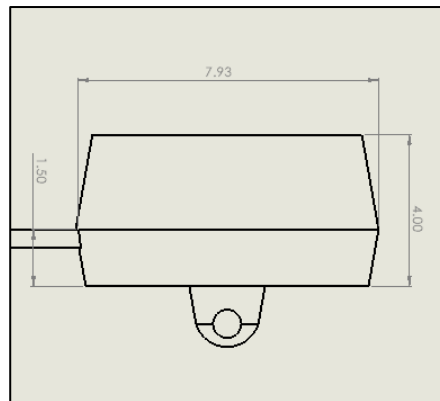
Sample geometry dimensions from the side view, units are in inches.
